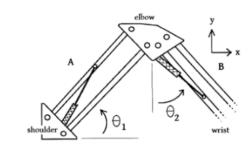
Olle's Adjustable Arm Supported Table Design [3]
